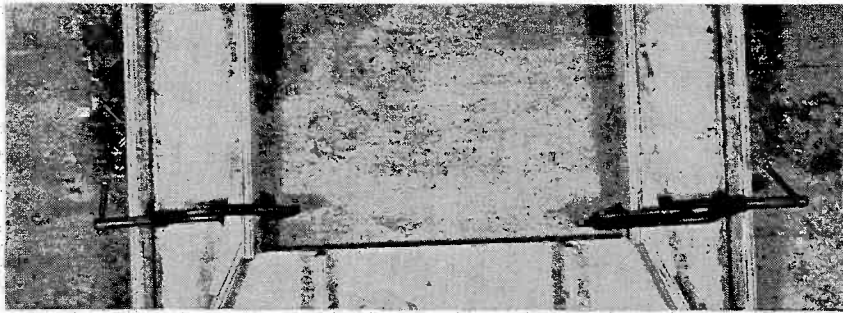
The author recommends using clamps to hold the bearing wedges in position. All joints should first be calked, and the wedges smeared with glue before clamping.
